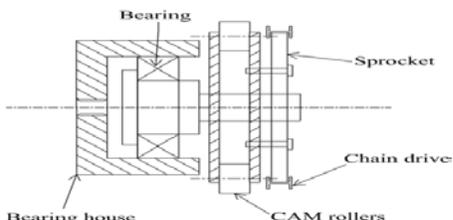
Cross sectional view of bearing hose, cam rollers and sprocket mechanism
